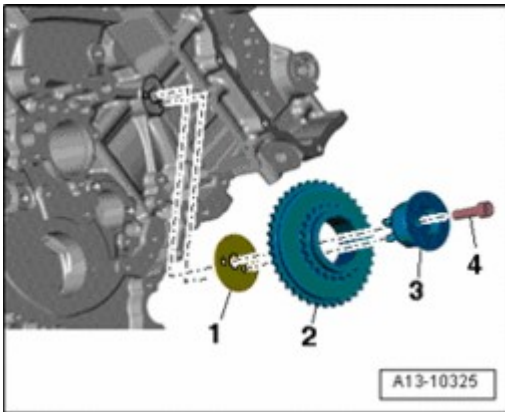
Right Camshaft Timing Chain Drive Sprocket Mounting Bracket Location
